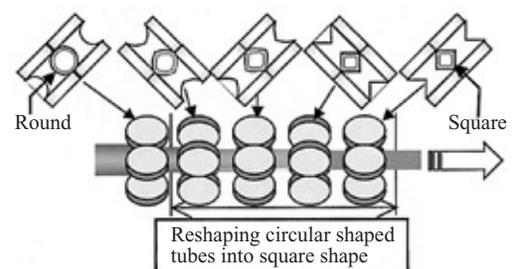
Schematic drawing of forming JFE Kakuhot using hot sizing mill
